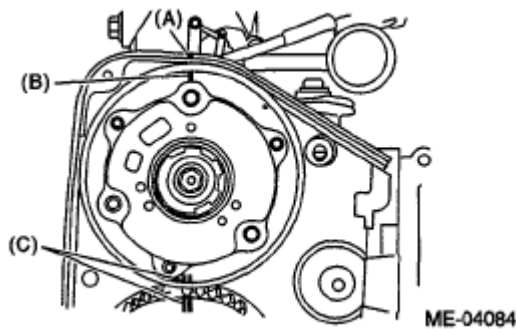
Identifying Alignment Mark On Intake Cam Sprocket RH Single Line Mark With Timing Belt Cover Notch
